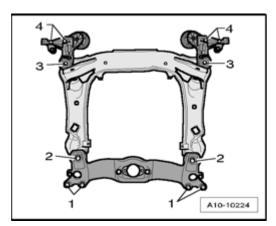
Removing/Installing Bolts In Diagonal Sequence And In Stages
